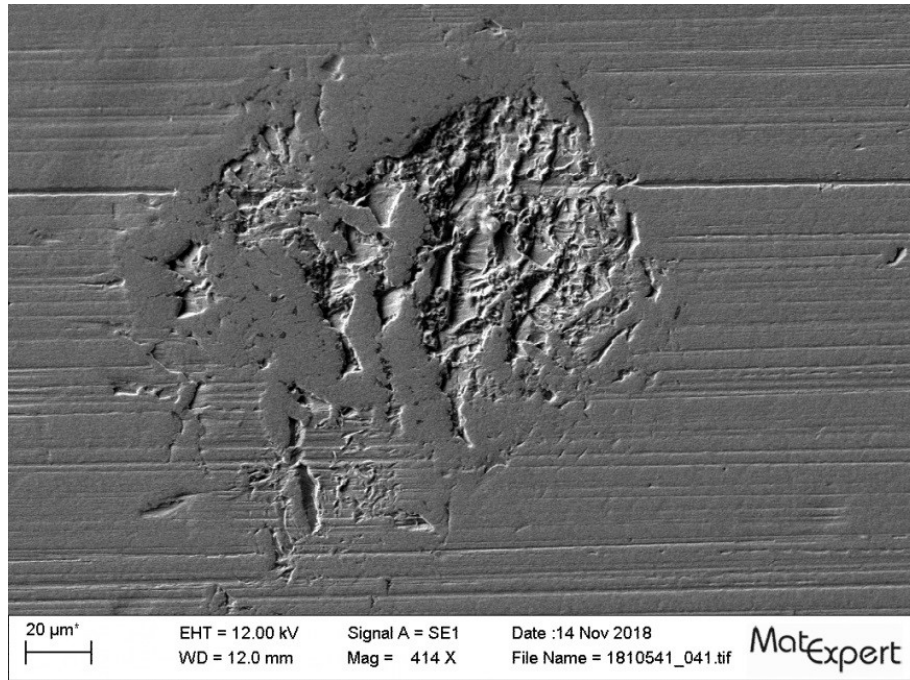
Ball bearing from the left engine, inner-race bearing track – material chipping, corrosion and minor pitting.
